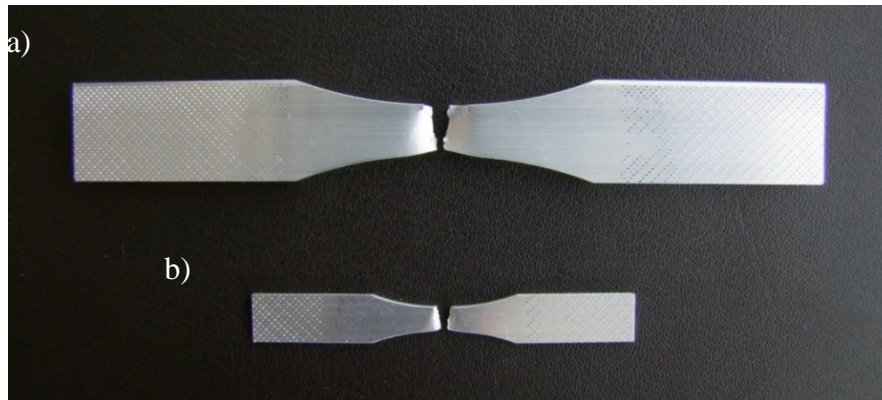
Photograph of the crack location: a) normative specimen; b) mini specimen
